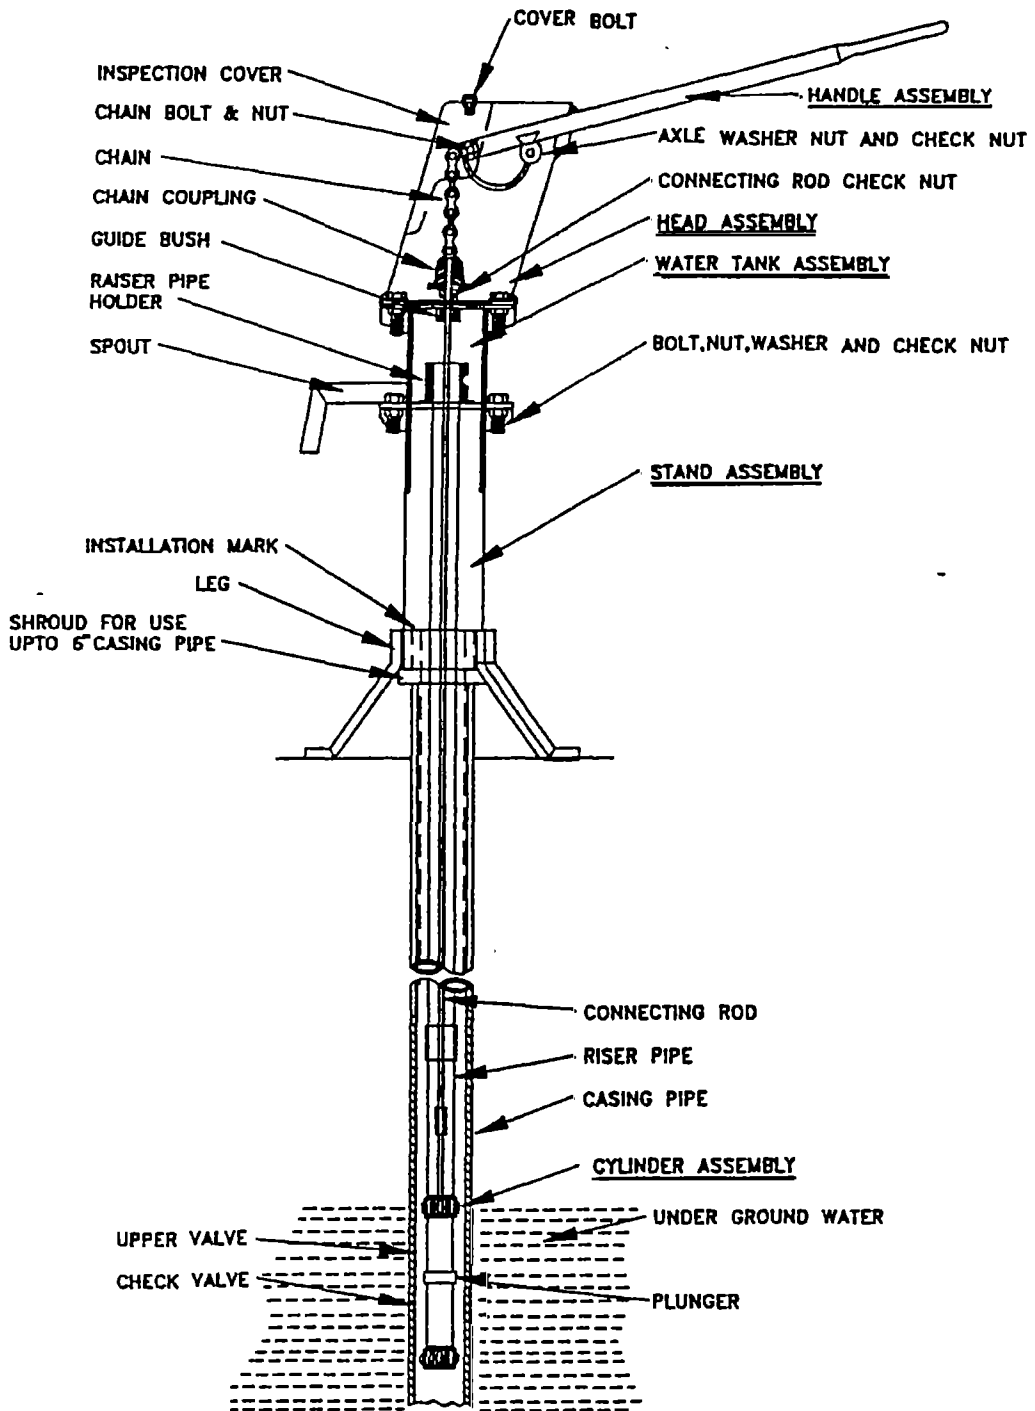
DETAILS OF HAND PUMP ASSEMBLY
